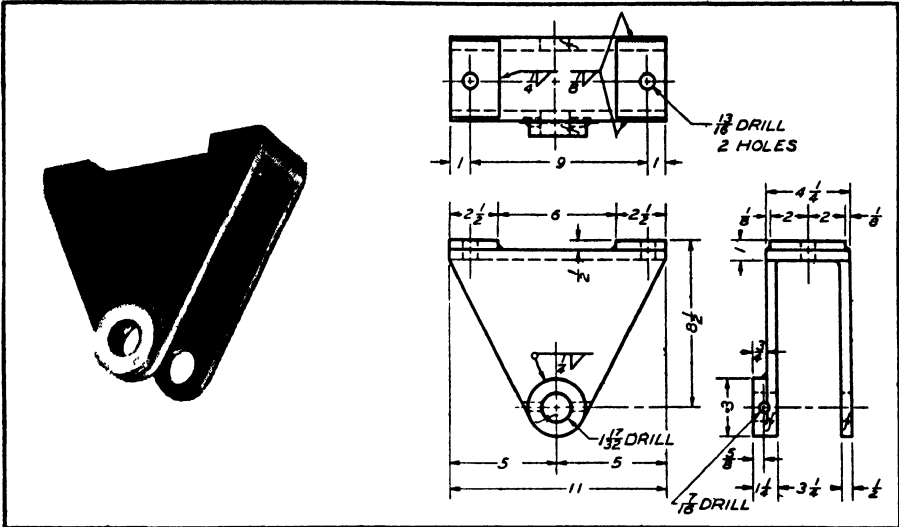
·2 Welded sheave housing. Prob. 423. (Wellman Engineering Co. and The Lincoln Electric Co., Cleveland, Ohio.)
